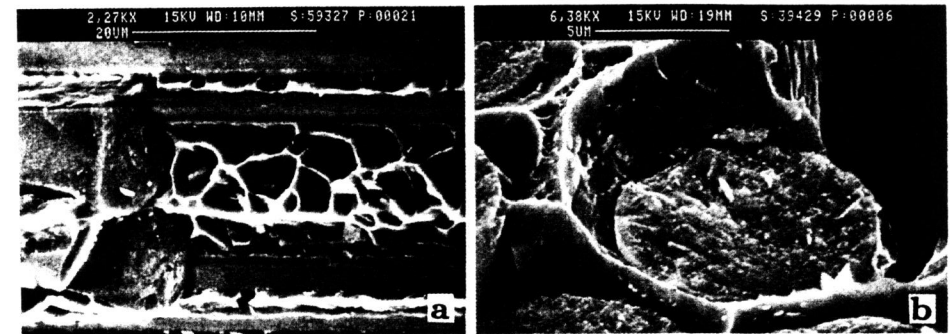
a) Transverse fracture surface showing fracture surface dimples on the matrix side showing precipitate particles continue to adhere to the Al matrix, b) fully developed rupture in remaining metal ligament, following fiber fracture.
